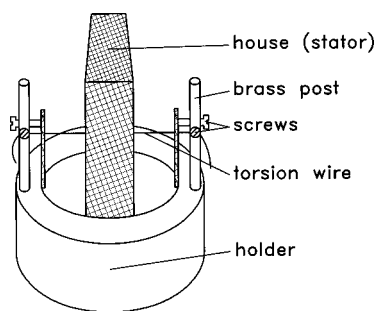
Schematic drawing of the mounting device used to assemble the various parts of the magnetometer.
